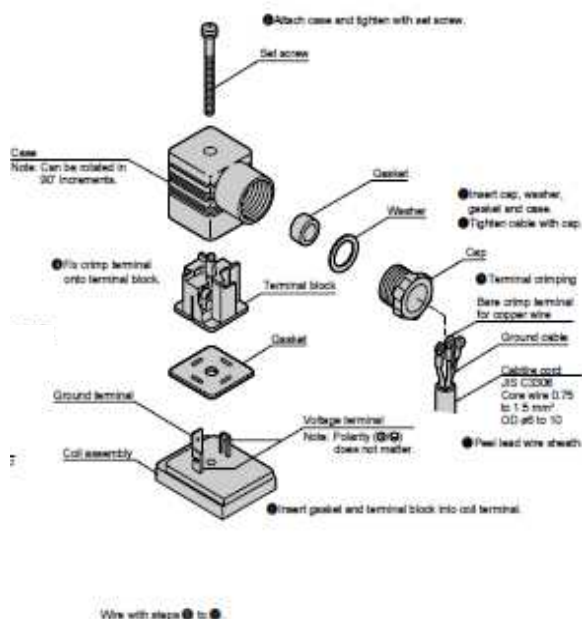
Explanatory diagram of method for solenoid valve wiring
